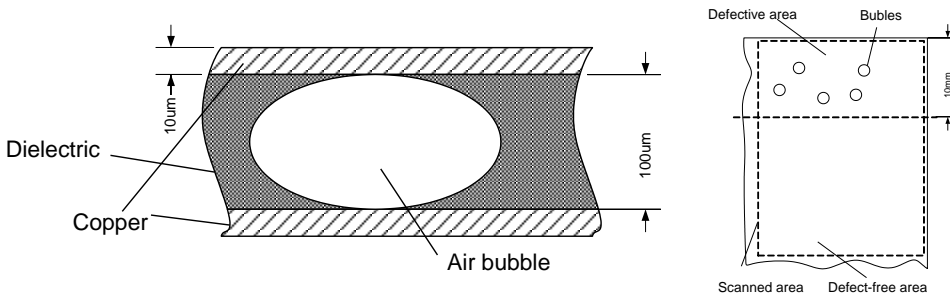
Cross section of the PCB layers (left) and drawing of the scanned area (right) [91]
